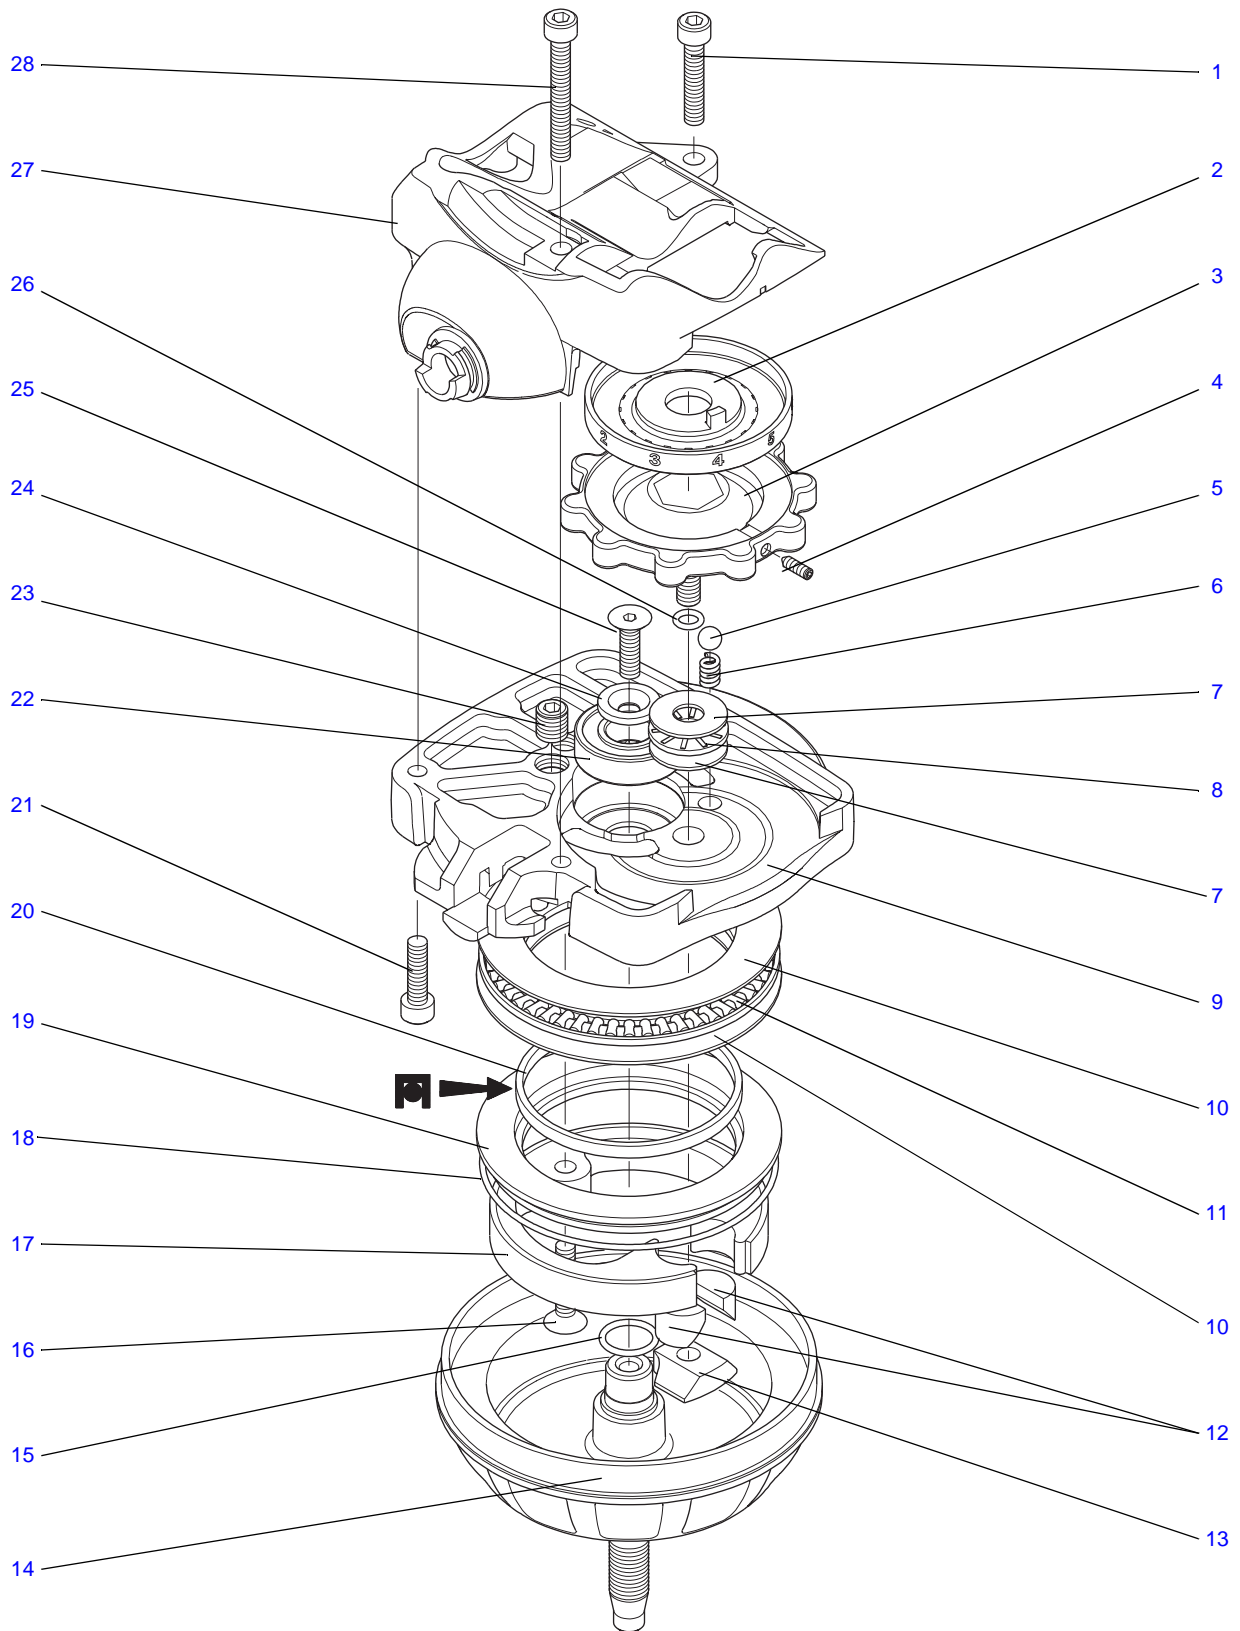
Vision 11 Pan and Tilt Head - Main Unit Assembly
